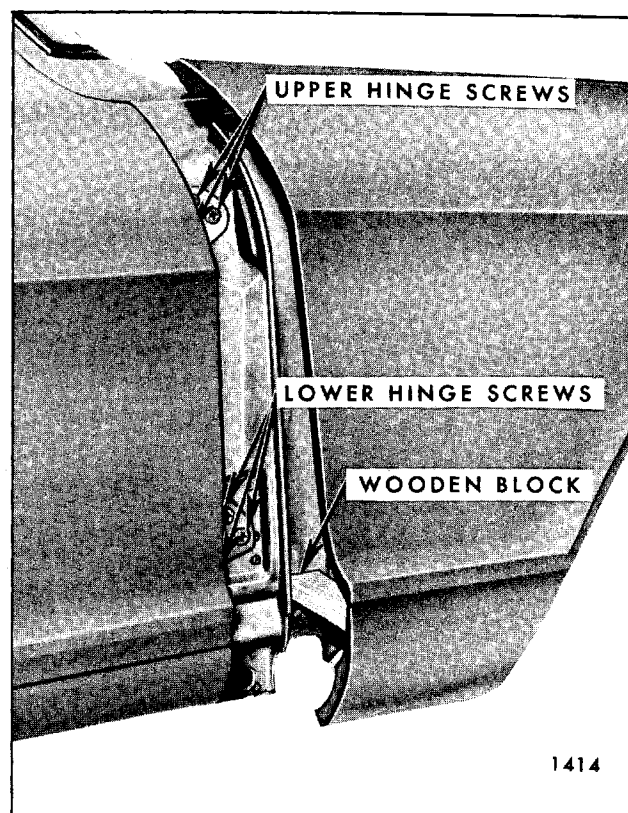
Front Door Hinge Removal - "X" Styles
